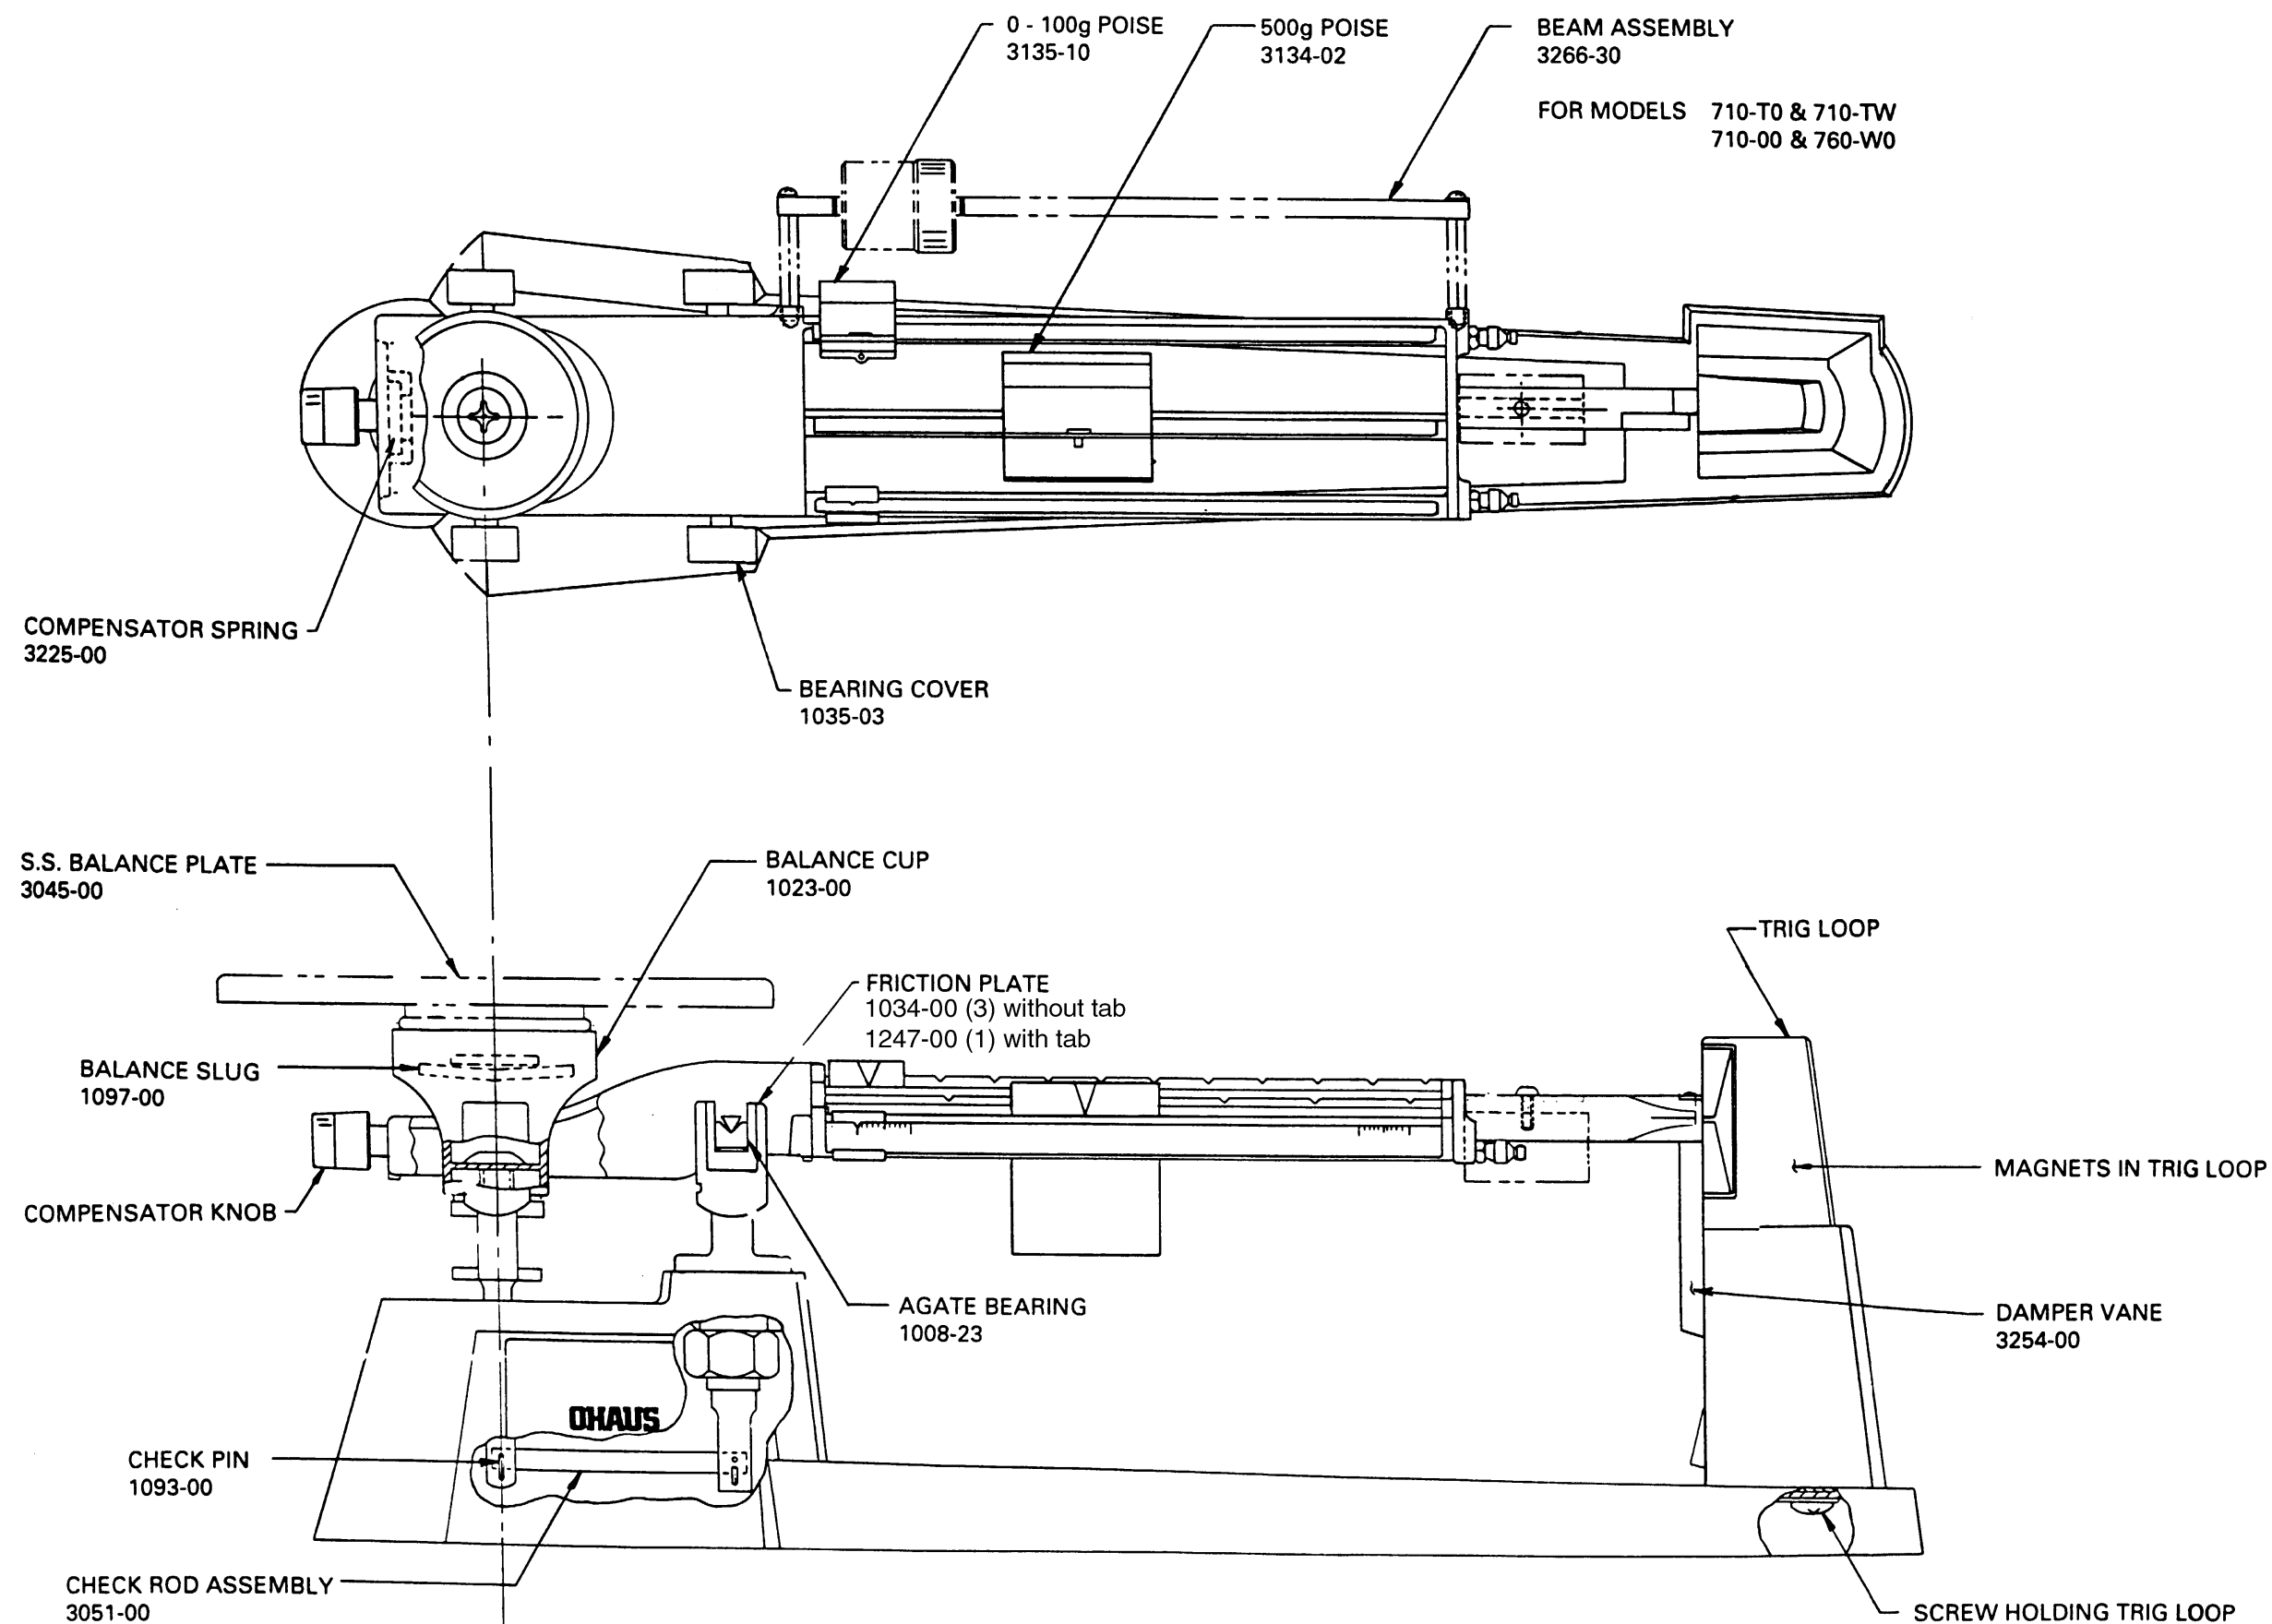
Typical Triple Beam Drawing. 5-3/5-4
